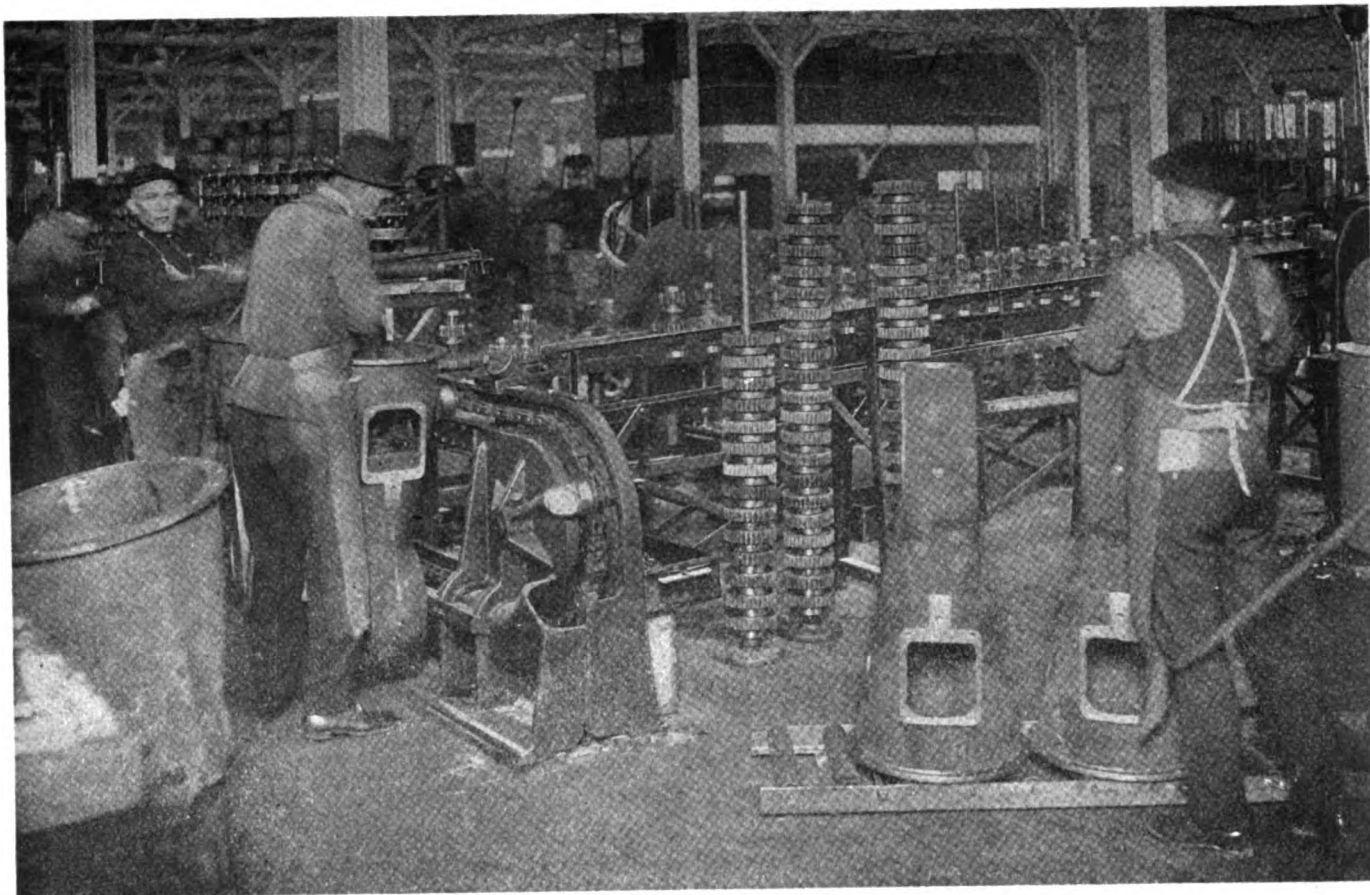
Looking ahead at the beginning of the transmission and rear axle assembly. Note the hooks on the chain which pick up the transmission housing and note the carriers from the arbor pressing department carrying the shafts with the gears in place
